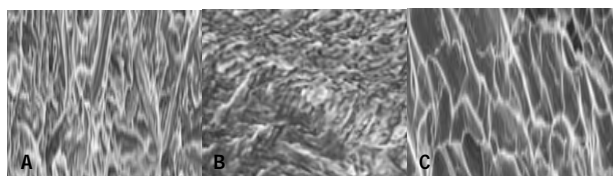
SEM micrographs of the fracture surfaces of Ti specimens. (A) laser welded with argon shielding; (B) laser welded without argon shielding; (C) control.
